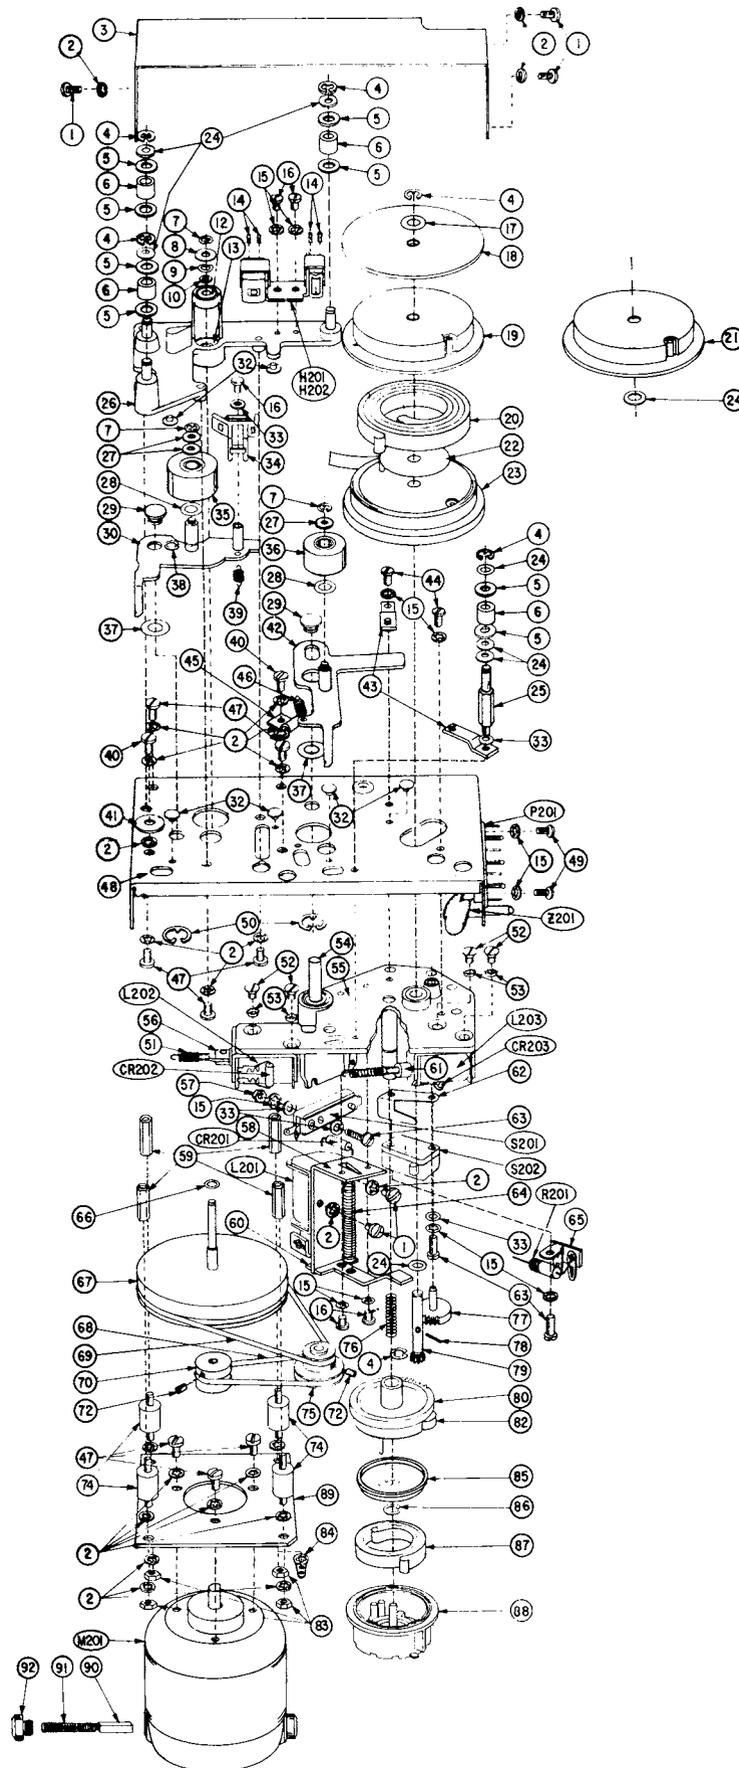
TAPE DECK EXPLODED VIEW
